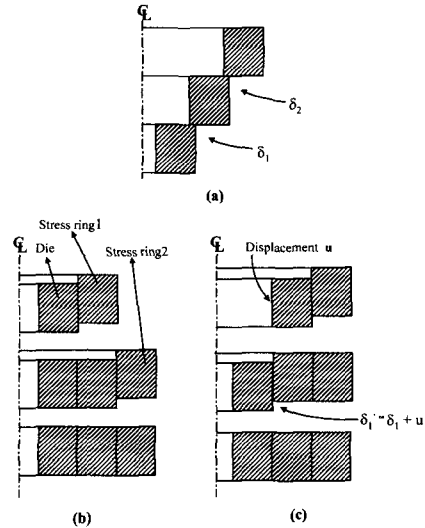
Two types of assembly method: (a) initial state before assembly (b) assembly method from inner ring (c) assembly method from outer ring
